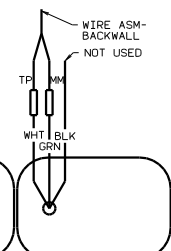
DETAIL AT (SHOWN FROM REAR VIEW) 04L
